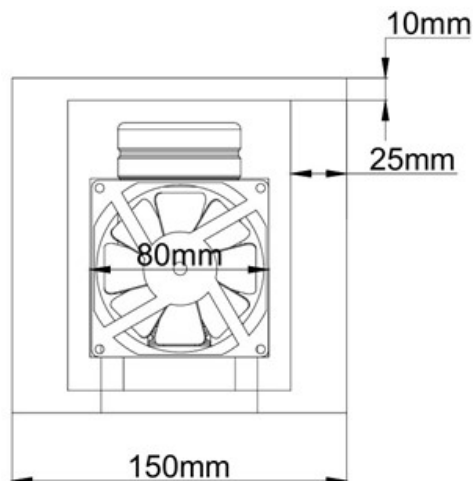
The right view of humidity chamber design 1, with dimensions.
